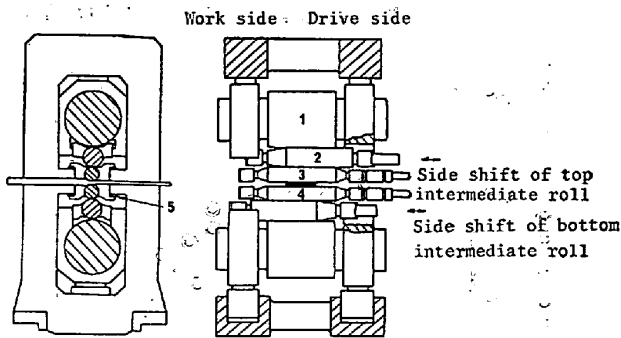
HC-mill with intermediate roll shift and work roll bending.
